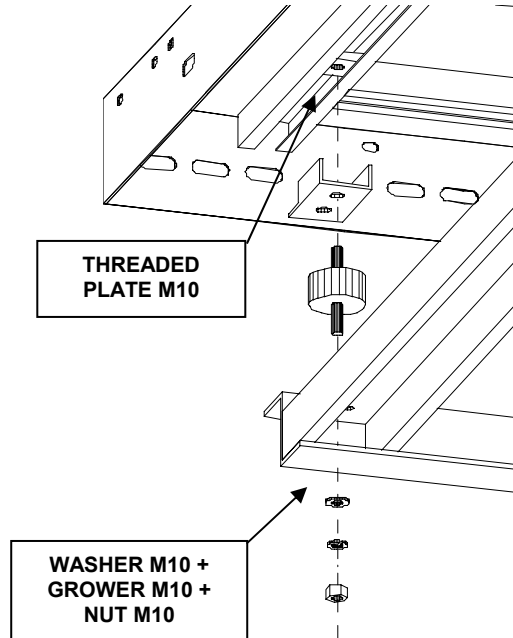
DETAIL OF THE OVERTRAVEL SWITCH FIXING
